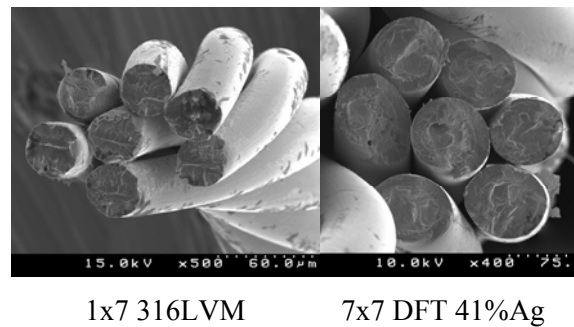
Fracture surface of cables tested under flexural fatigue
